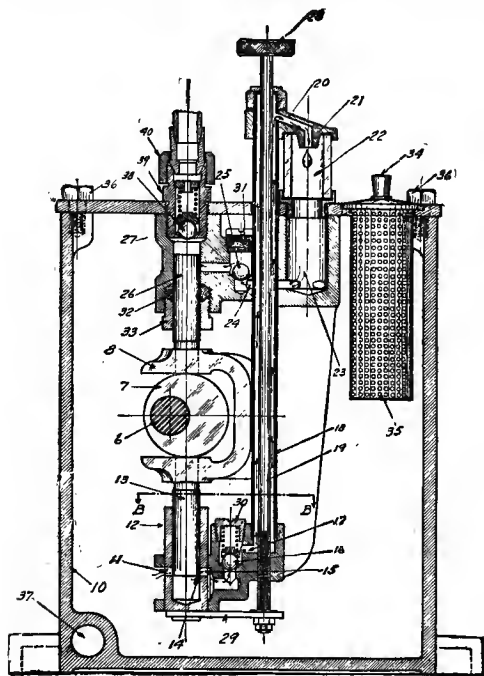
Sectional view of a Phenix forced-feed lubricator body and a pumping unit.
